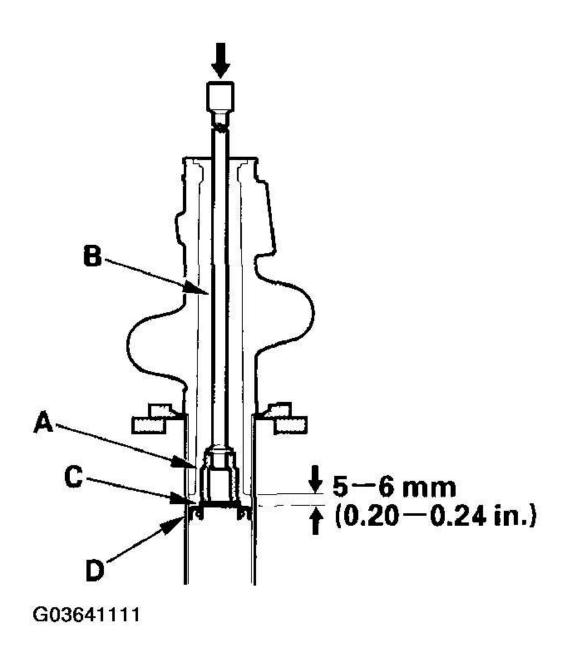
Installing Socket Wrench On Drive Extension Courtesy of AMERICAN HONDA MOTOR CO., INC.
